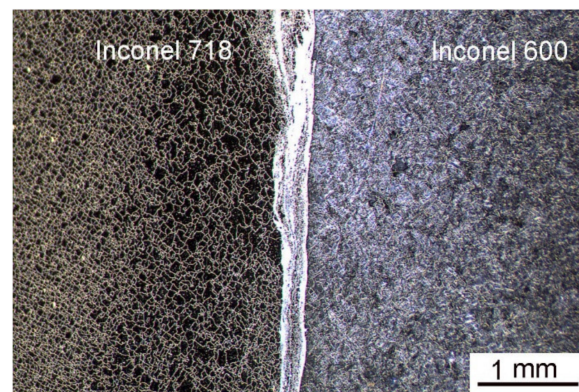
Macrograph of Inconel 718/Inconel 600 dissimilar friction weld.
